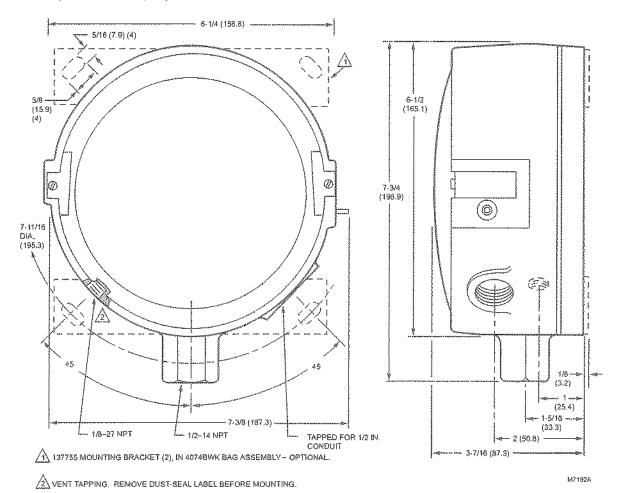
Installation dimensions of the C437 gas pressure switches, in in. (mm).
